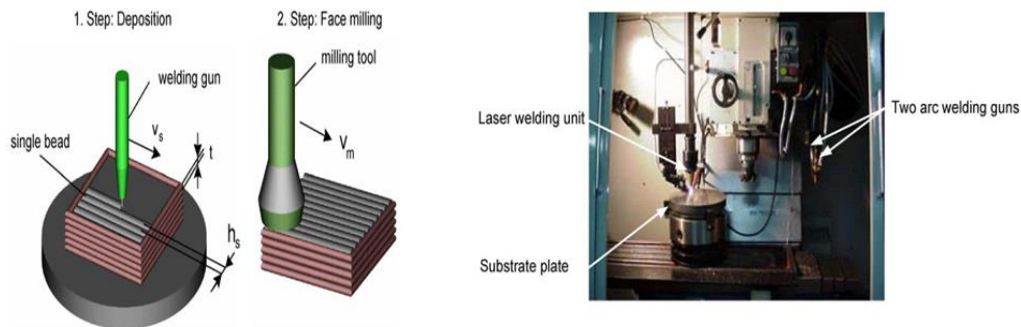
Process principle of 3D Welding and Milling (Song et al. 2005; Song, Park, and Chae 2005).
